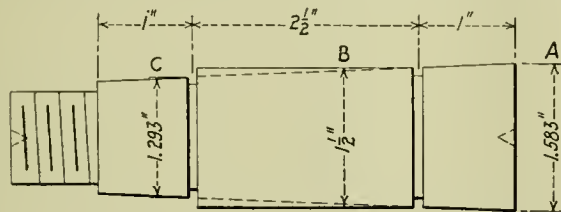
Standard Pin With Taper of 1-In. per Foot
